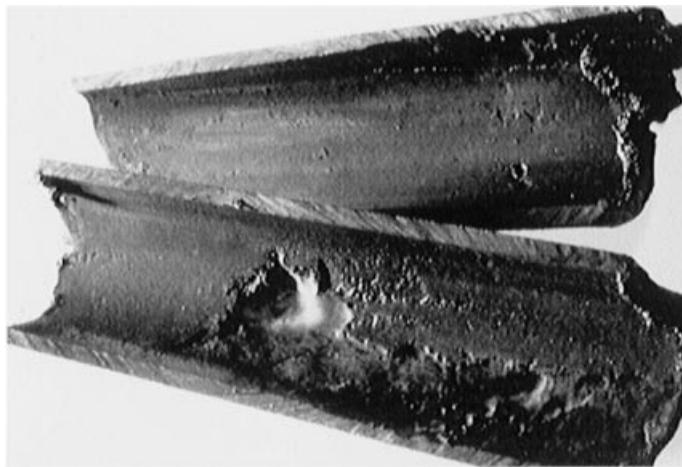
Pitting corrosion is damaging because it can lead rapidly to equipment failure.
